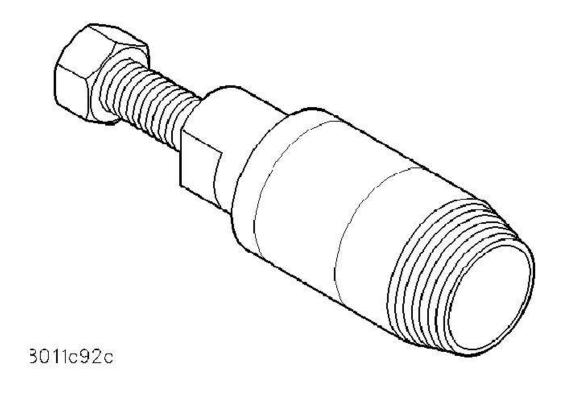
Crankshaft Seal Remover 6771 Courtesy of CHRYSLER LLC
